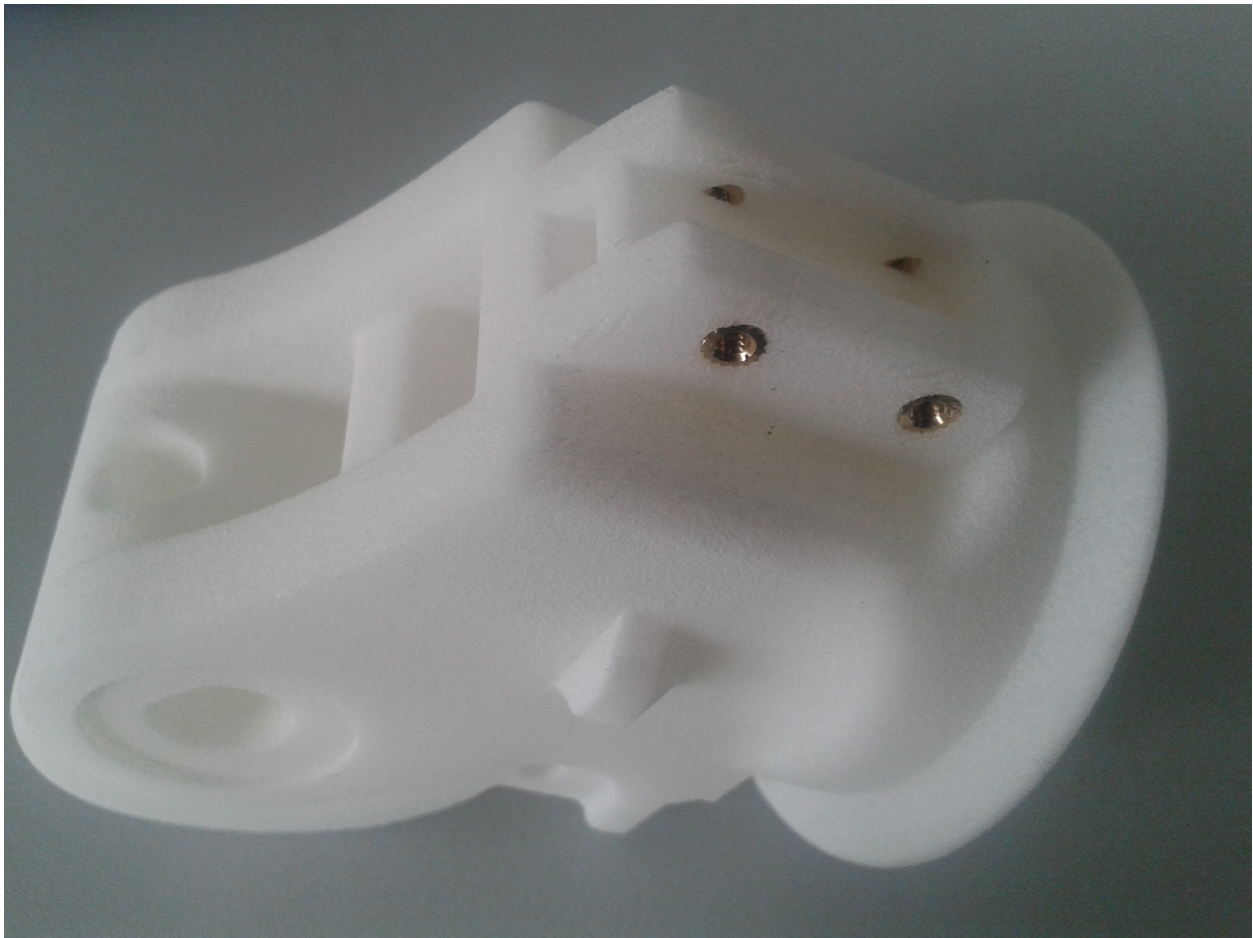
Press the four M2 brass inserts into the upper joint fork using pliers or a bench vise.
